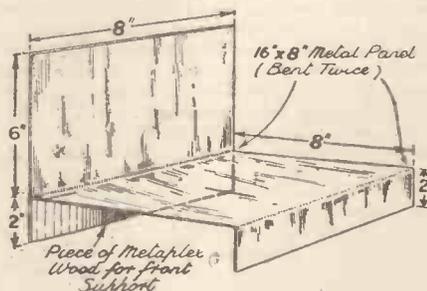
Details of the metal chassis referred to by Lionel Chester this week.
